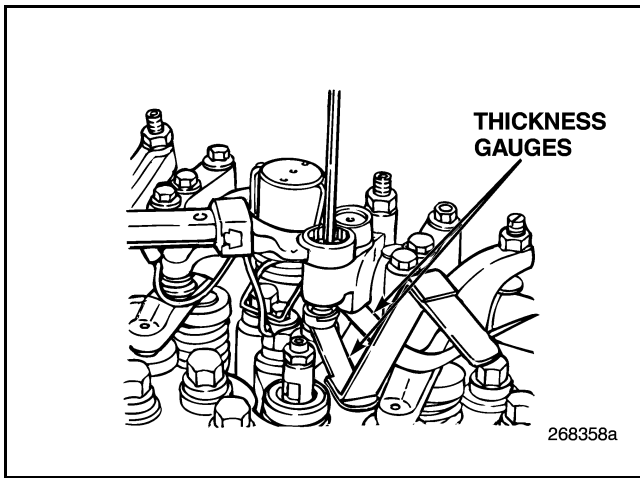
Tightening Swivel-Head Adjusting Screw Jam Nut
